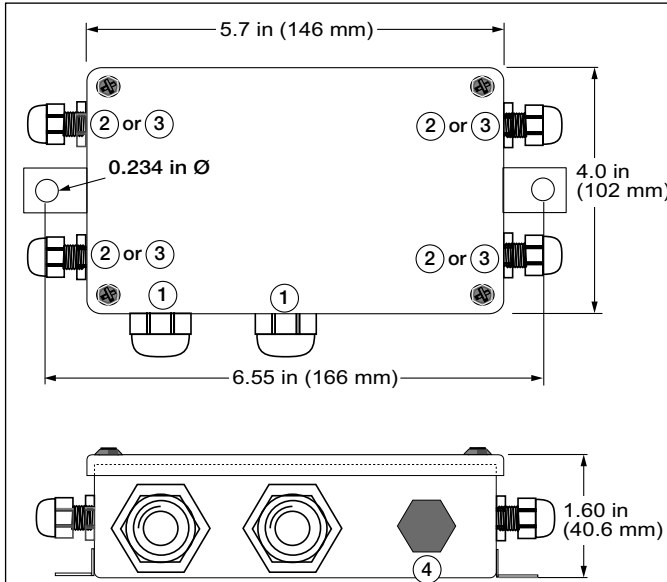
JB4ES and JB4SS Enclosure Dimensions
